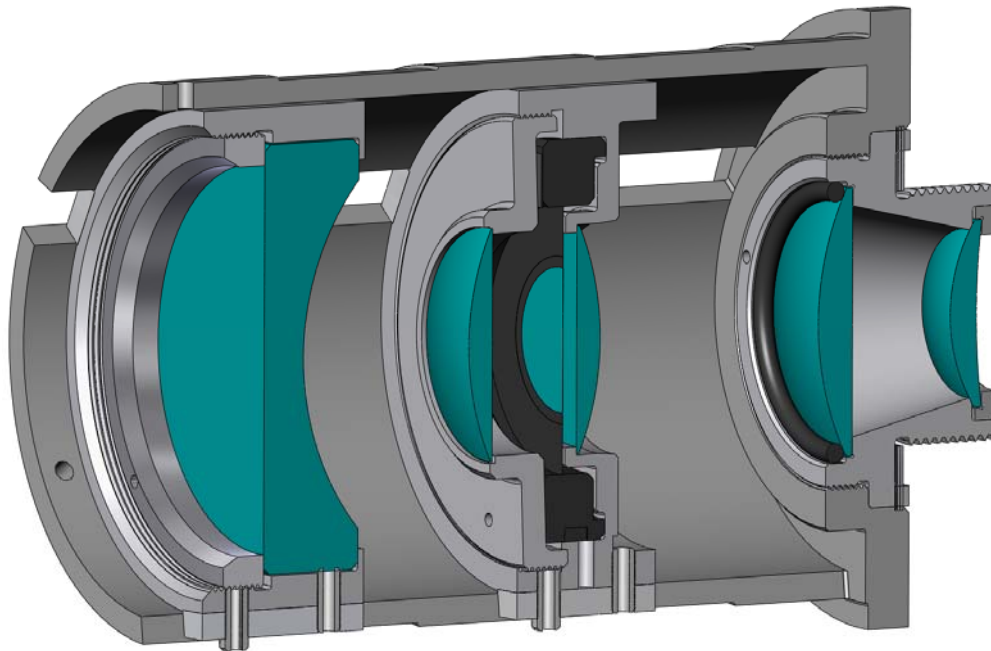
Cross section view of mount/housing assembly in prototype 3.4.
